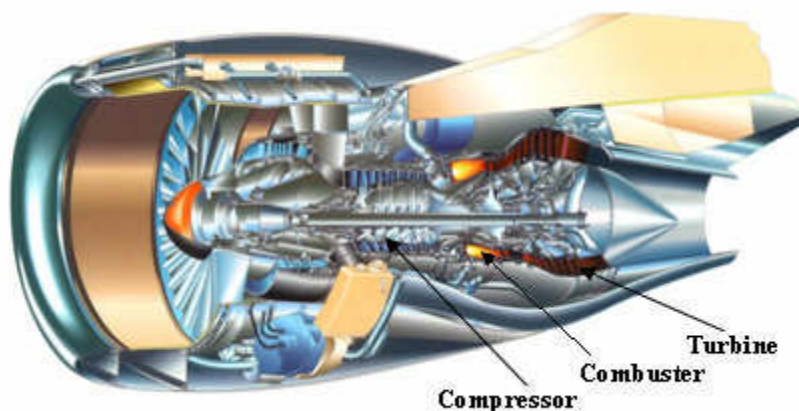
A cut out PW6000 jet engine featuring the location of the turbine case.
